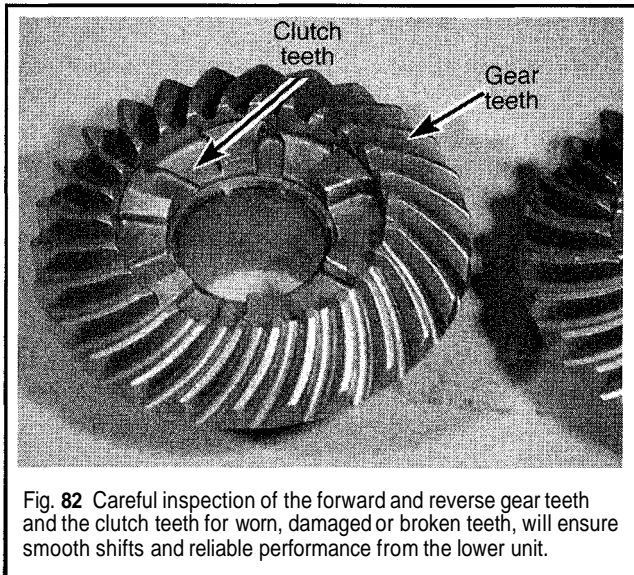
Careful inspection of the forward and reverse gear teeth and the clutch teeth for worn, damaged or broken teeth, will ensure smooth shifts and reliable performance from the lower unit.
